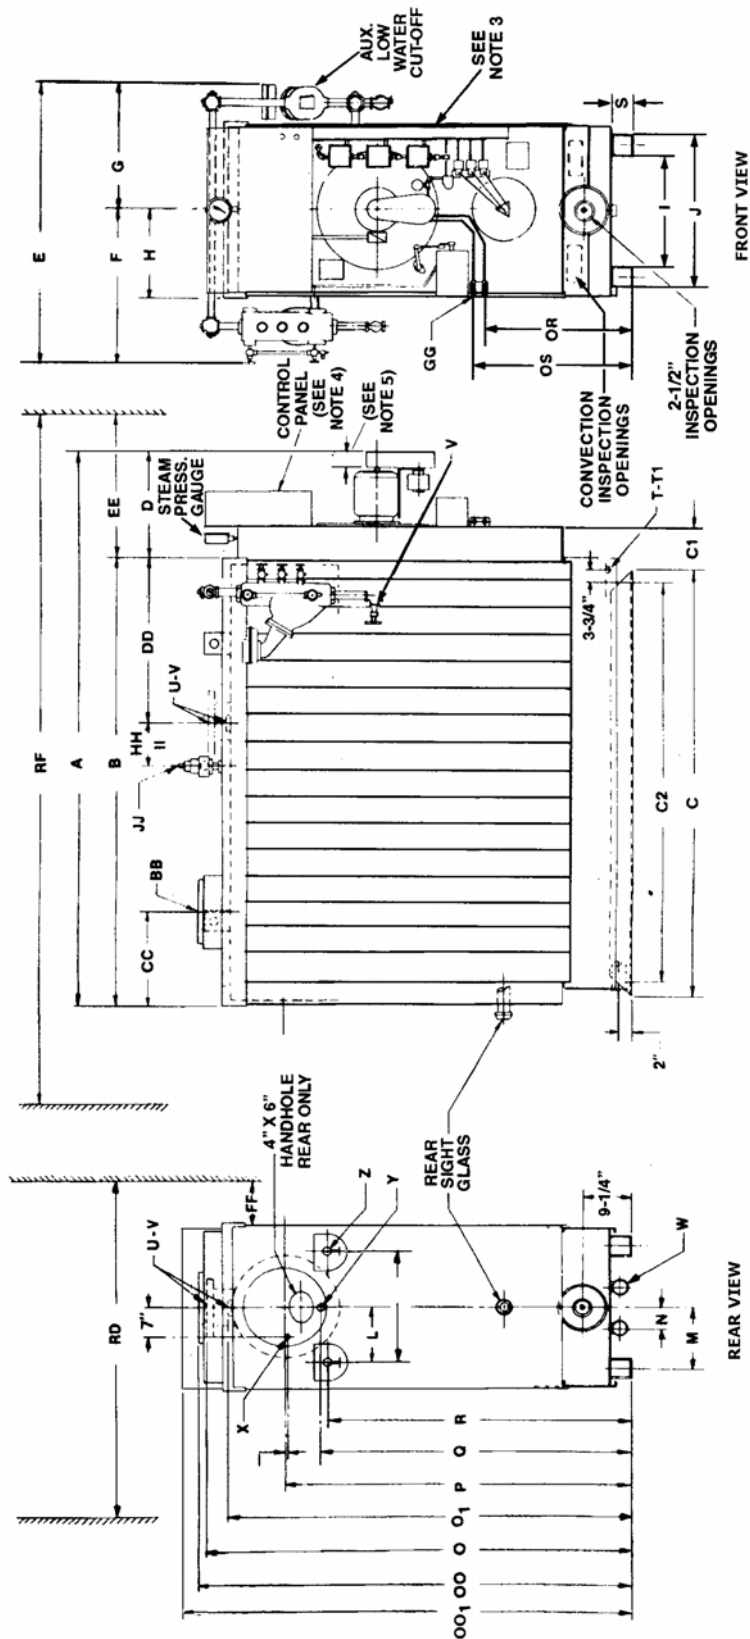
Model 5 Dimensions (sheet 2 of 2)
